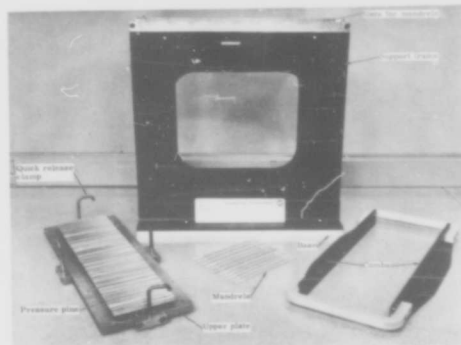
Electron Beam Weld Tools for Honeycomb Core
